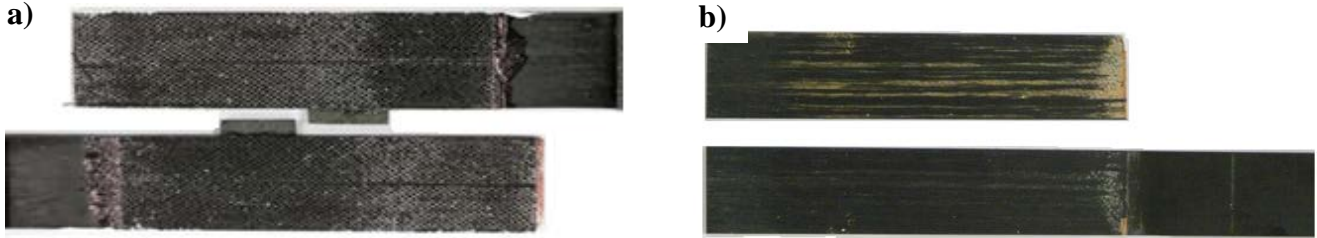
Fracture surfaces of tested joints: a) single lap joint specimen and b) skin-doubler specimen
